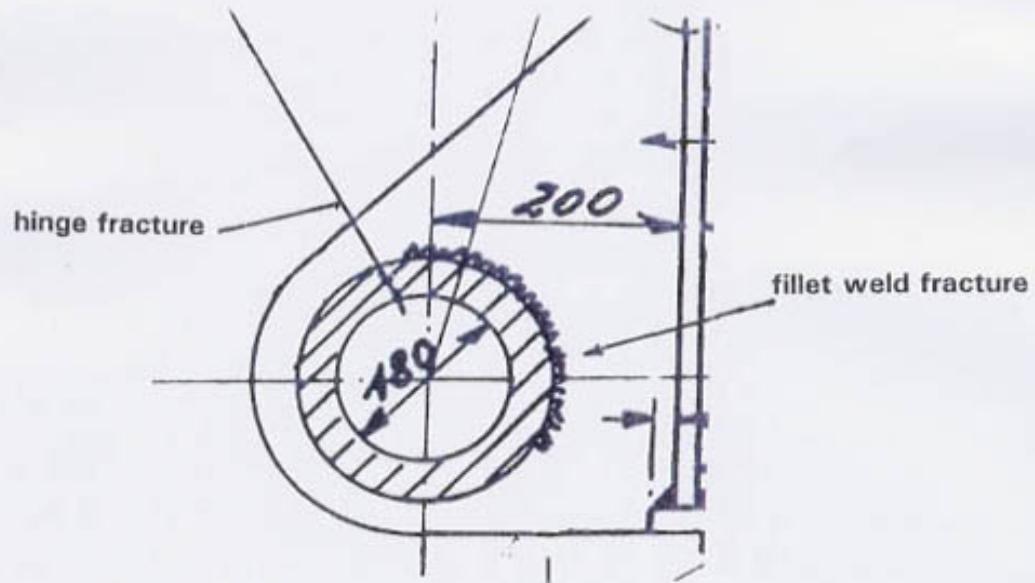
Location of fatigue cracking at hinge welds of "ESTONIA" (mm)
